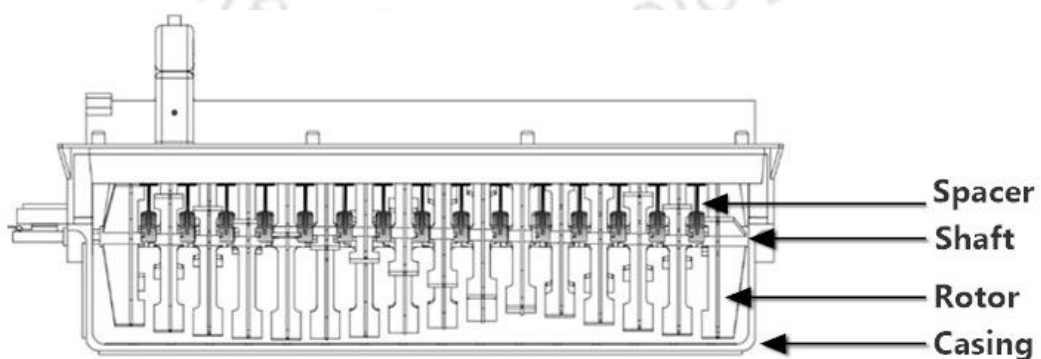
Schematic diagram to represent arrangement of spacers, rotor assembly, cutting blades inside casing.
